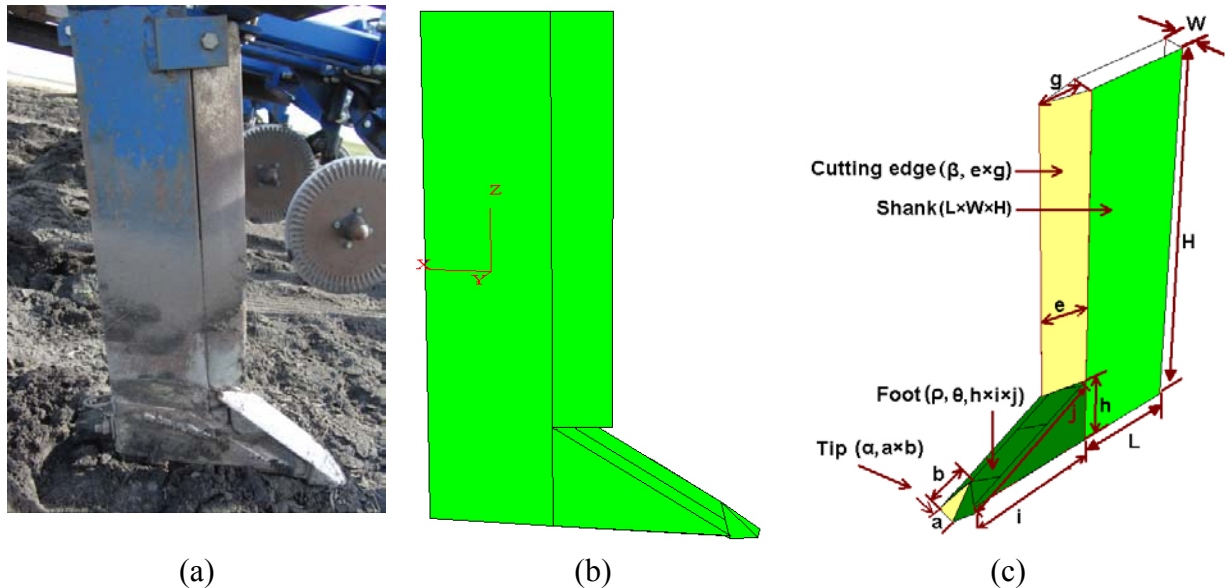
Tool geometry of the ripper; (a) photo of the ripper tool (side view); (b) side view of the virtual tool and coordinate; (c) 3D-front-top-view of the virtual tool with dimension symbols.
